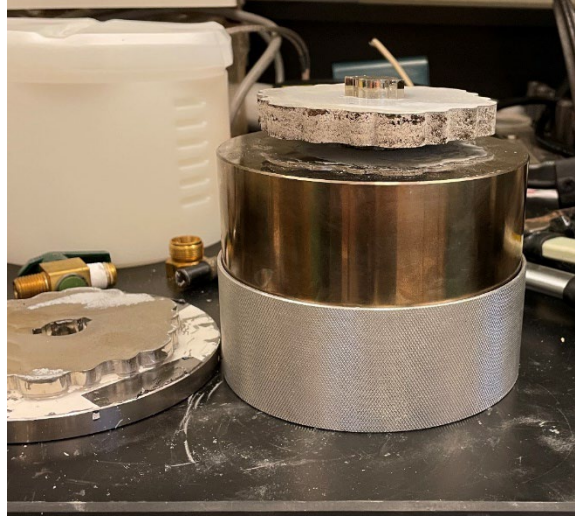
DHAM rotor assembly after partial demolding.
